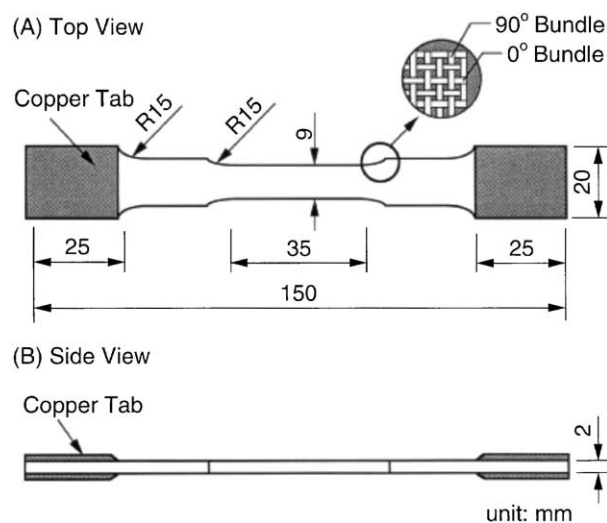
Shape and dimensions of the specimen for monotonic tension testing.
